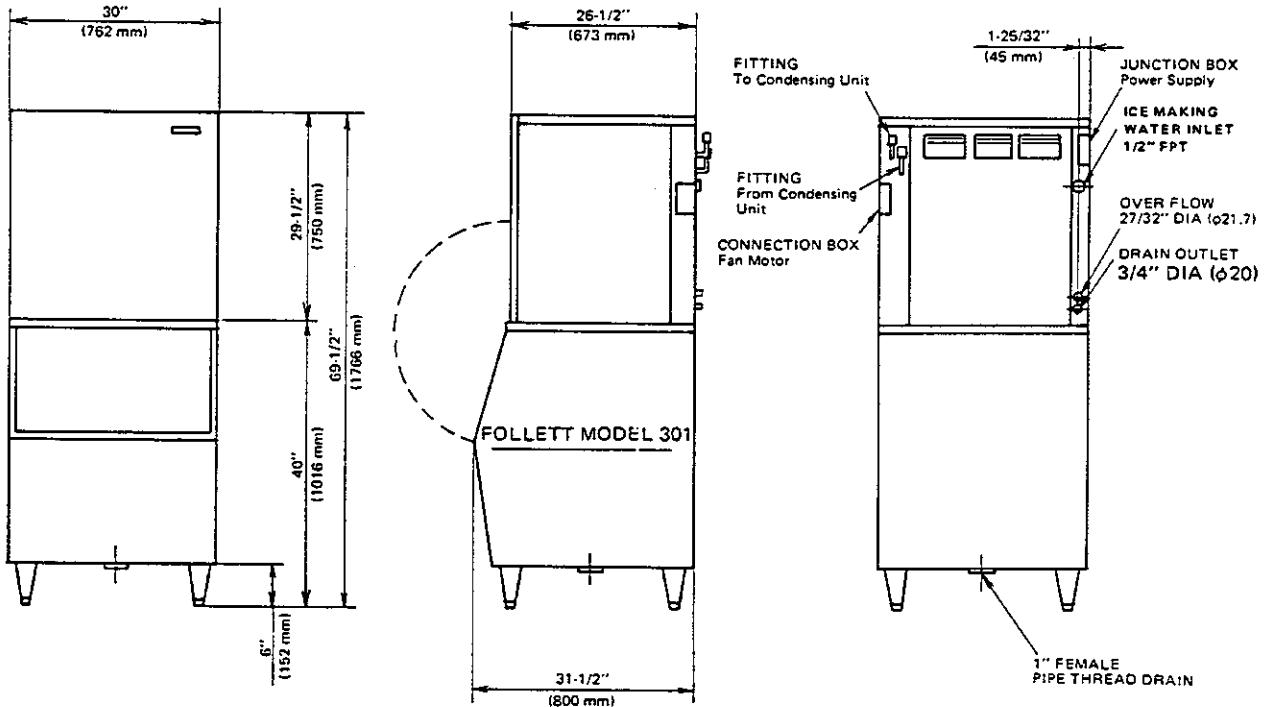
Dimensional drawing for Ice Storage Bin Optional
